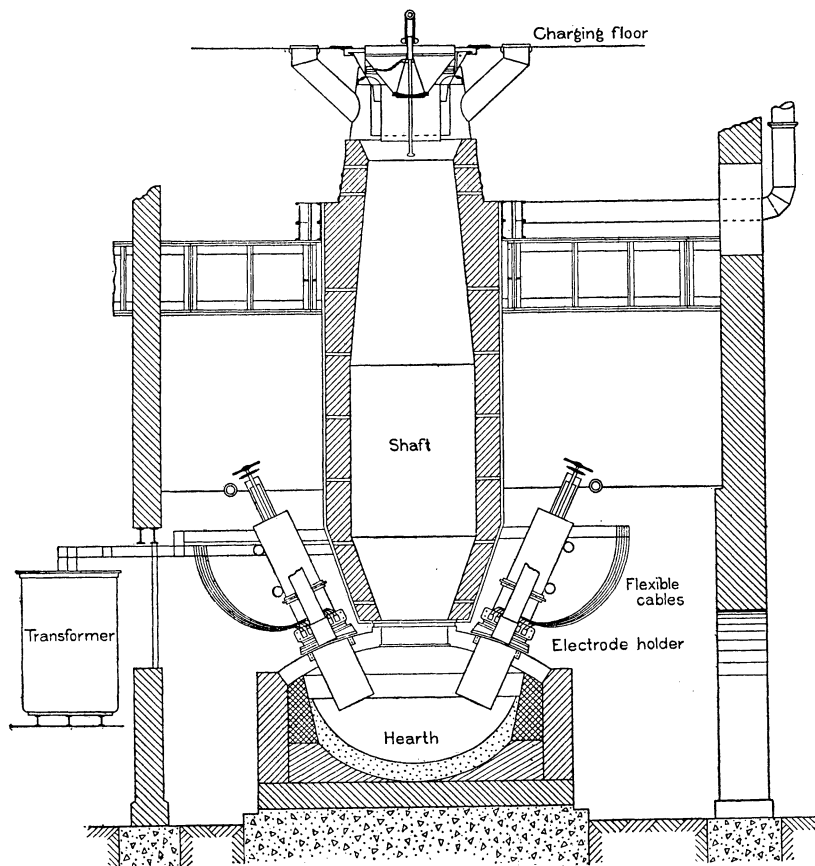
Sectional elevation of furnace at Trollhättan.
